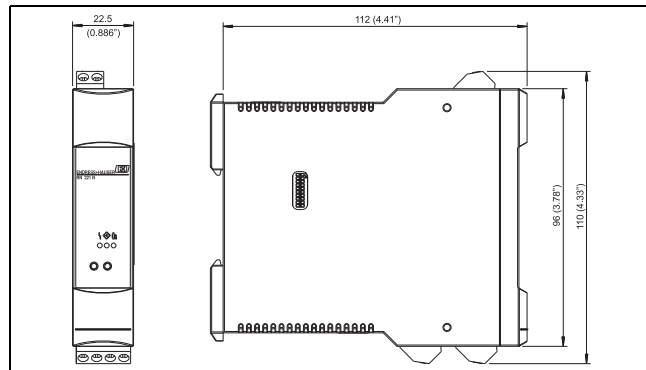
Dimensions in mm (dimensions in inches in brackets)
